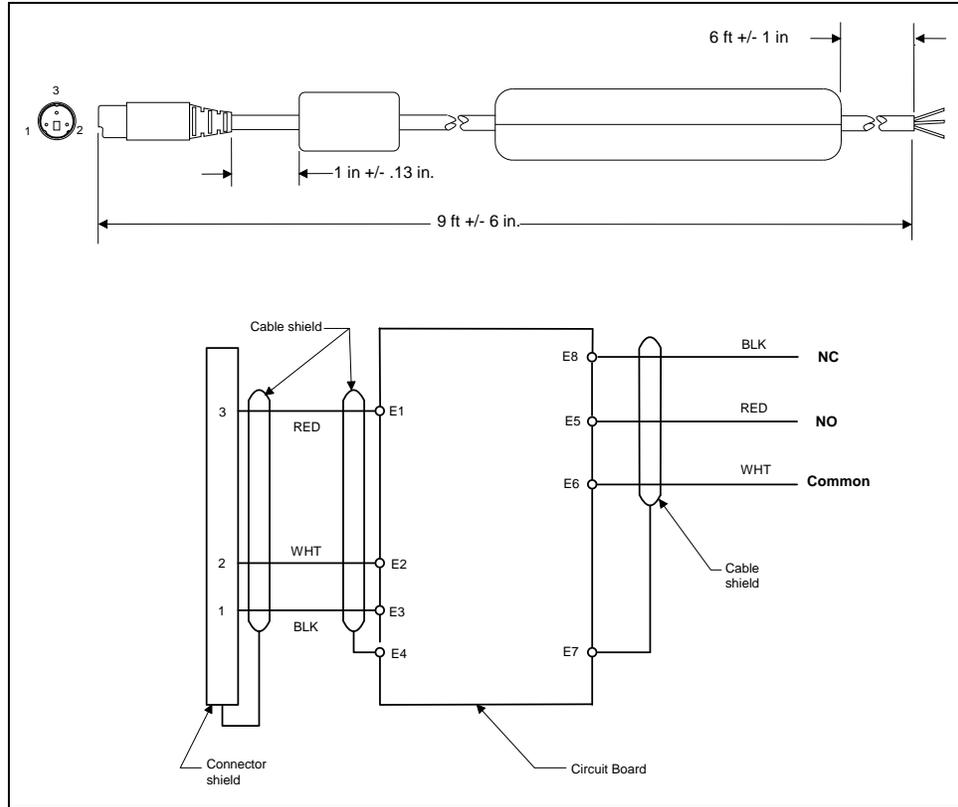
Nurse Call Cable (3 Pin Circular to Unterminated)
